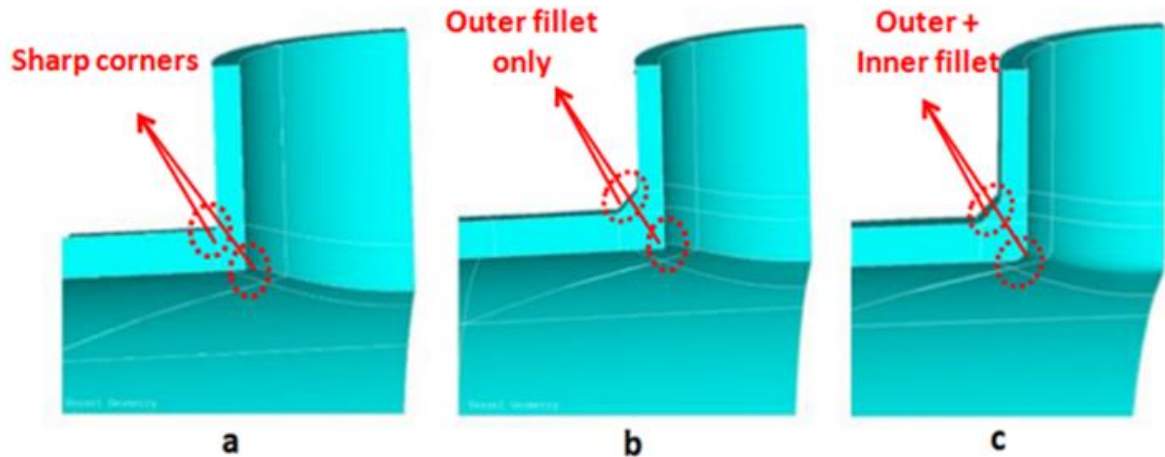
2 a =no fillet, b =only outer fillet (welding), c =inner and outer fillet together.
